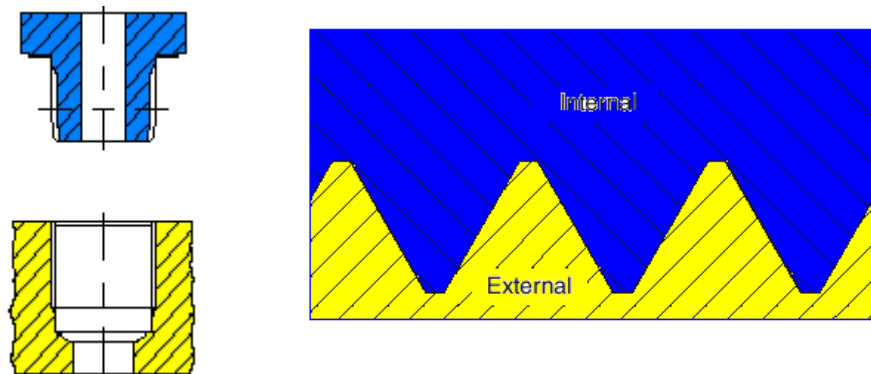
National Pipe Taper Fuel (NPTF) – sealing on first assembly is achieved by the interference fit between the threads
